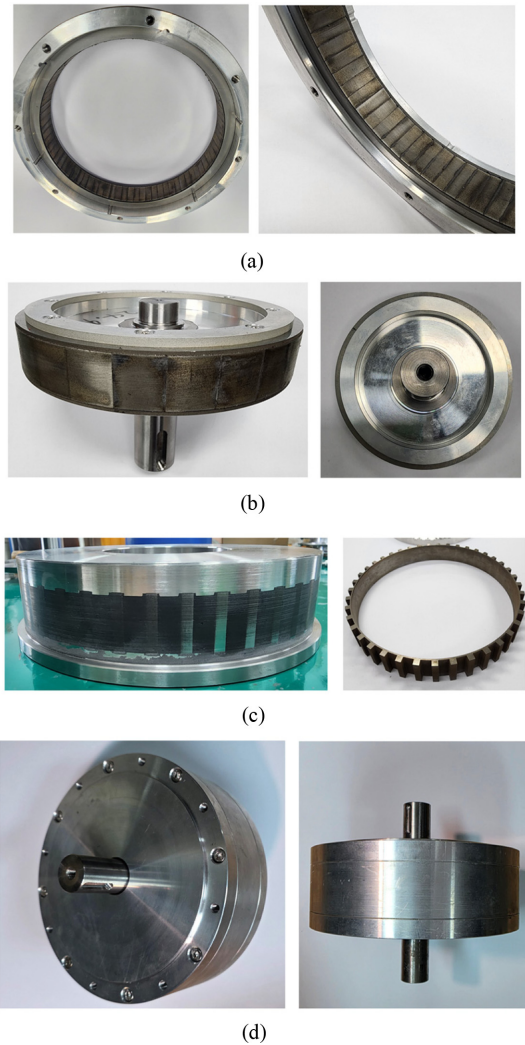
Main active components and prototype of the optimized magnetic gear. (a) Outer stator part of MG, (b) Inner rotor part of MG, (c) Pole piece part of MG, (d) Prototype of optimized MG
